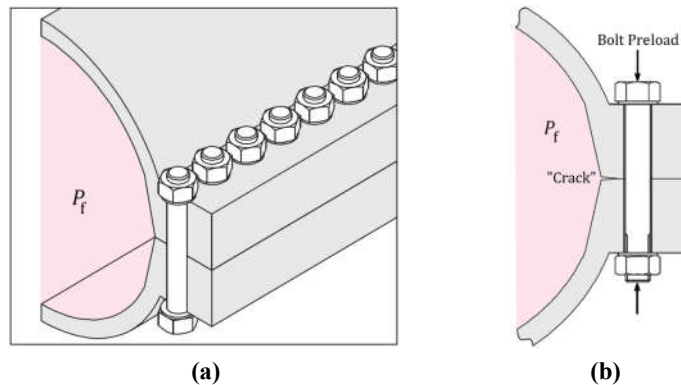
(a) A flange with internal pressure and a linear bolt pattern. (b) Partial separation of the flange due to the internal pressure. (Adapted from Beghini *et al.*)¹⁷⁶
